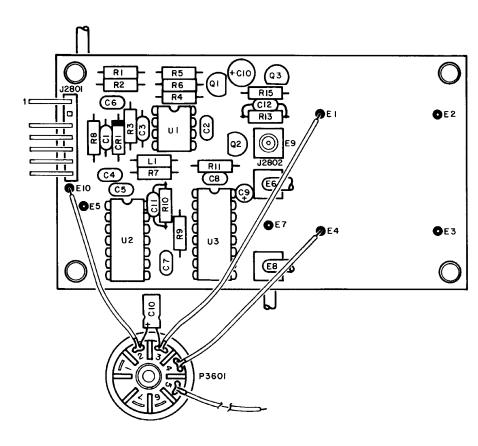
DVM I/O PC Board Assembly (Incl Option 10) (Sheet 2 of 2) (0000-5510-100-E4)
